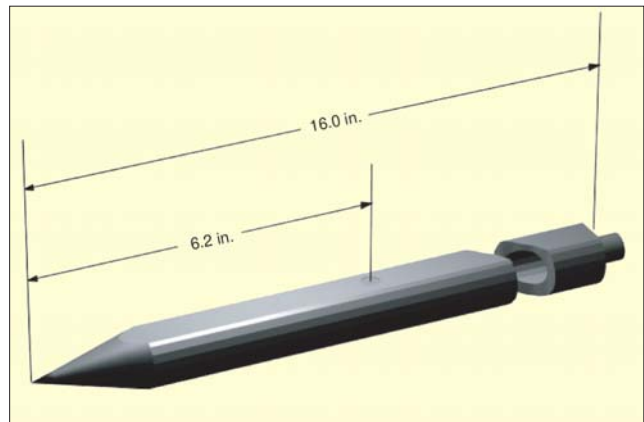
Outline drawing of the Pencil Probe in Figure 4.
